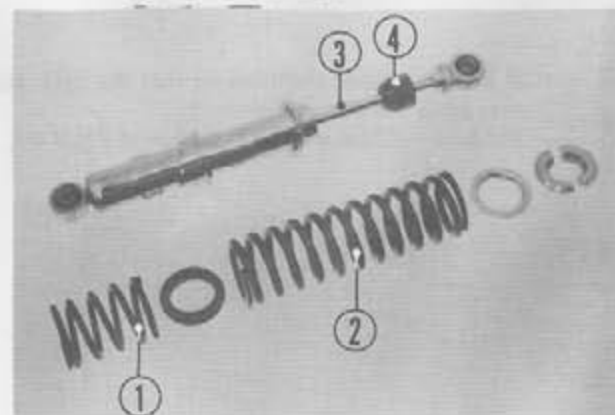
① Rear suspension spring A ② Rear suspension spring B ③ Rear damper rod ④ Stopper rubber
